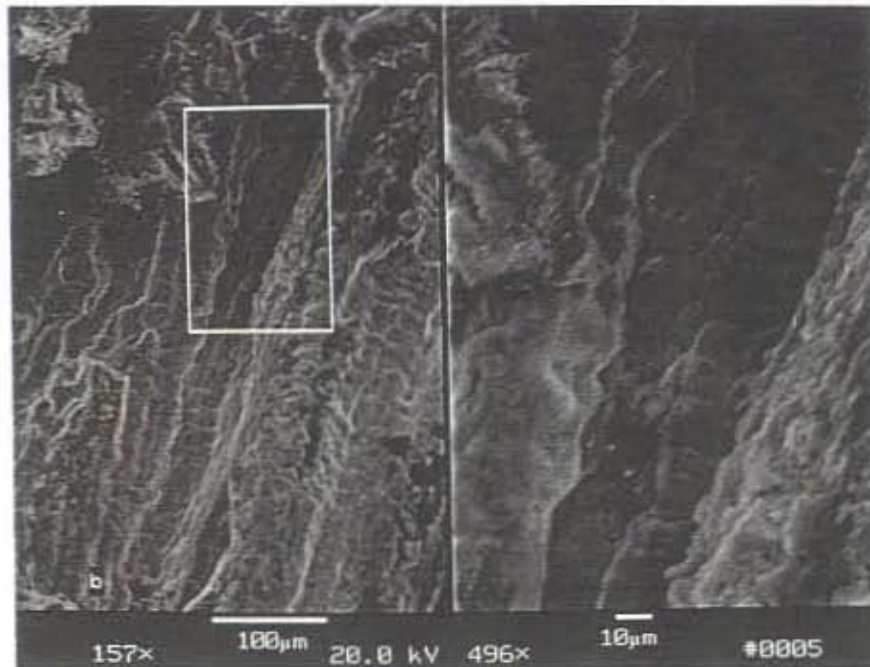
Crack Surface of Defect 1B Obtained in the Initial Defect Region (Area "b" in Figure 17) Showing Solidification Structures Typical of Hot Cracking in Weld Metal. [Mag. 157X & 496X]
